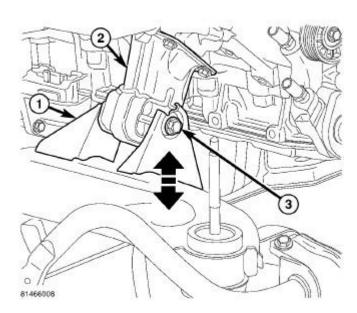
ENGINE MOUNT BOLT Courtesy of CHRYSLER LLC
